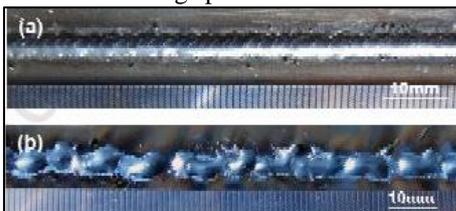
Weld appearance at 70A MIG welding current (a) conventional MIG weld, (b) TIG-MIG
